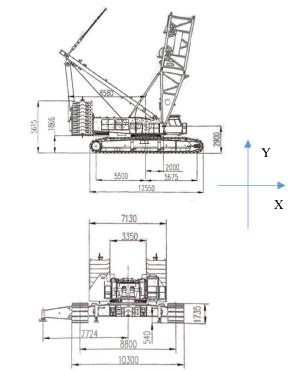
Geometric dimension data of side steel structure of the crawler crane
